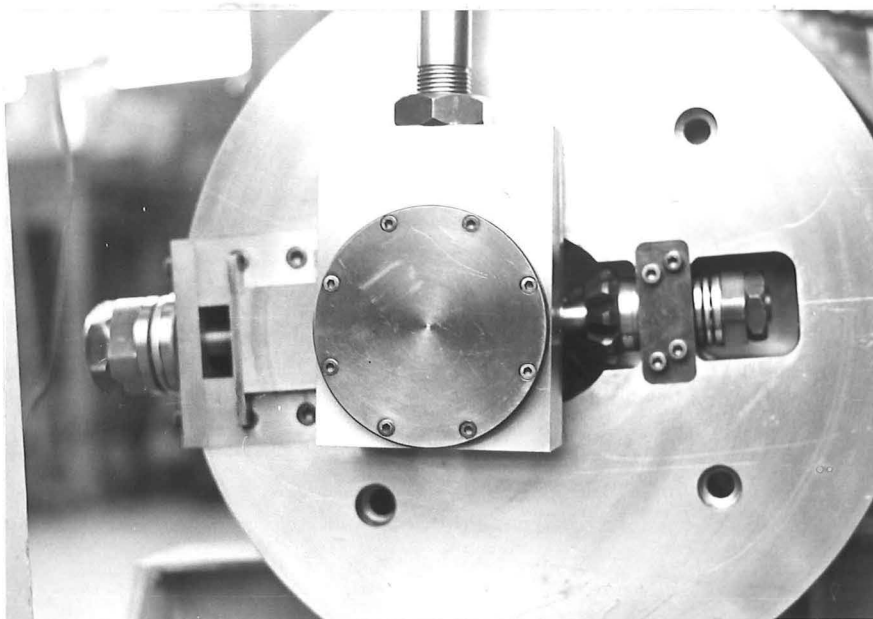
MAIN DISC. Side view showing the main screw together with the thrust bearings and the small bevel gear. Also shown are the conrod and mild steel bearing housing and a small portion of the slide.
